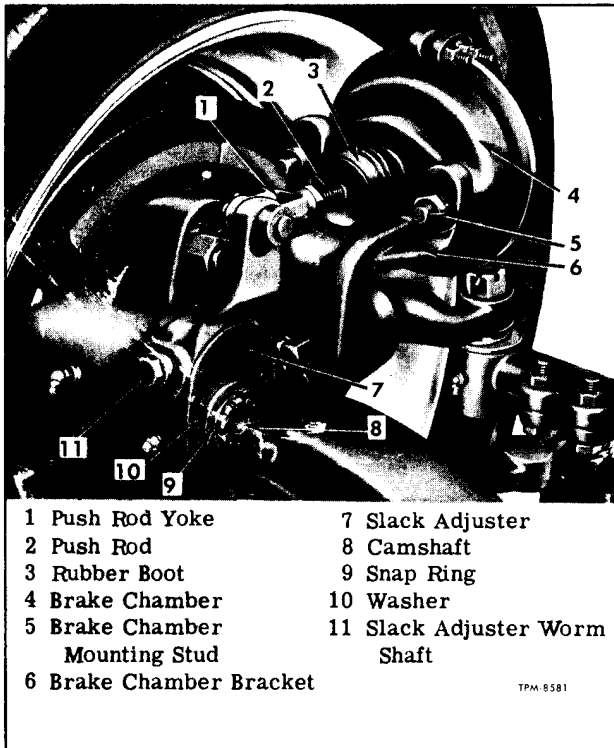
Brake Chamber, Bracket, and Slack Adjuster Mounted on Axle (Front)
